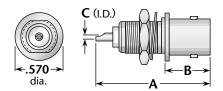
(Front mount, pressurized [non-hermetic], with mounting gasket)
